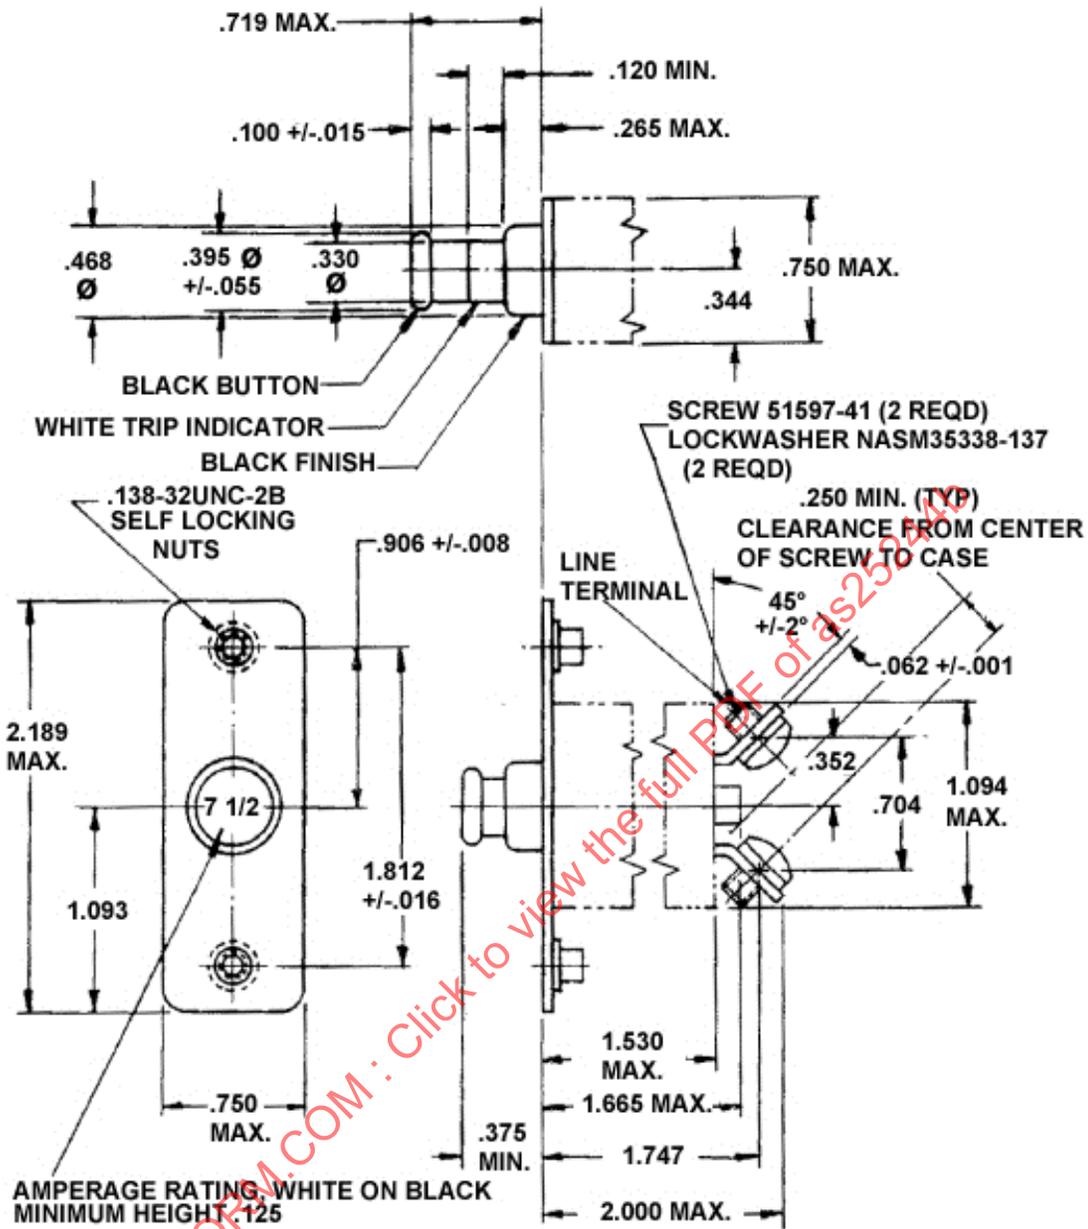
CIRCUIT BREAKER CONFIGURATION AND DIMENSIONS (MODIFIED WITH AN ADAPTER MOUNTING PLATE)
